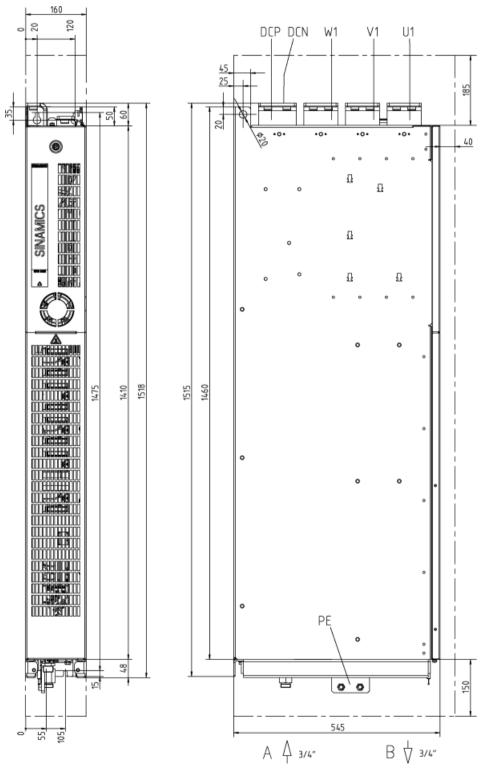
Dimension drawing, Basic Line Module, frame size GBL. Front view, side view
